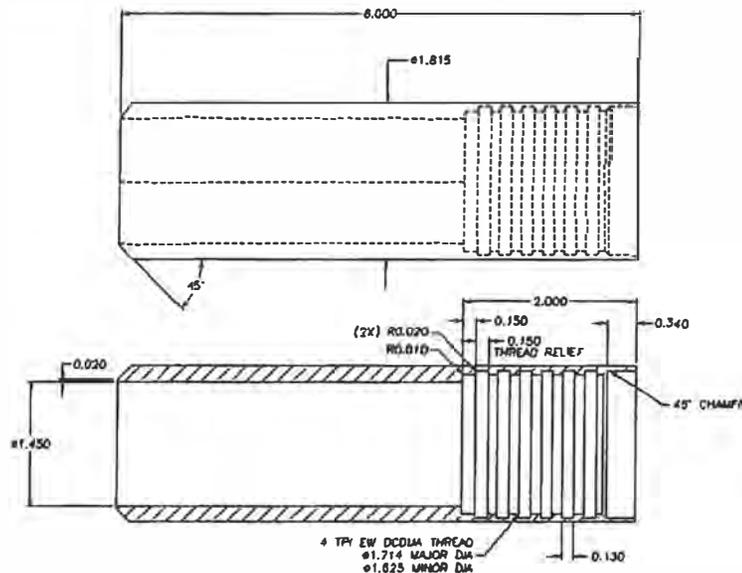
Crowd-Out Cutting Show with 3.5% Inside Clearance Ratio
